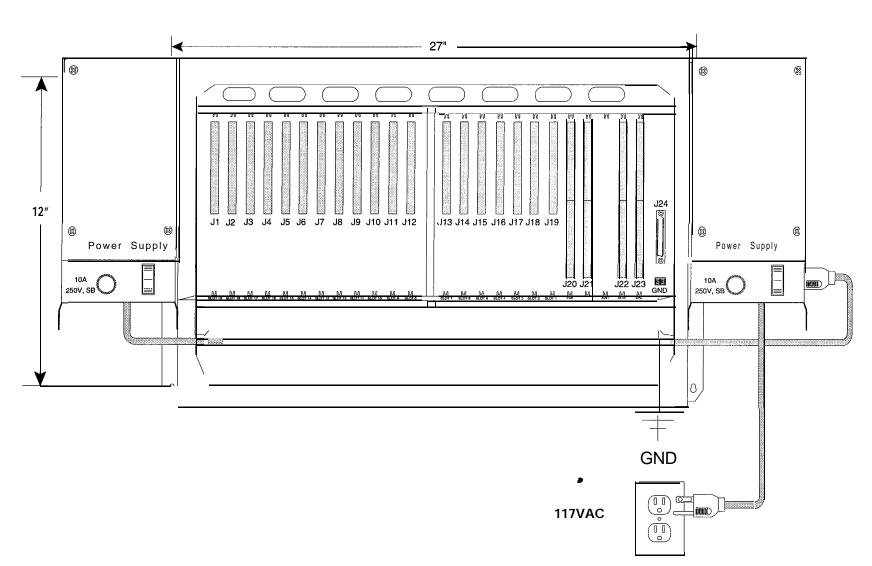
Basic KSU Cabinet Mounting Dimensions
